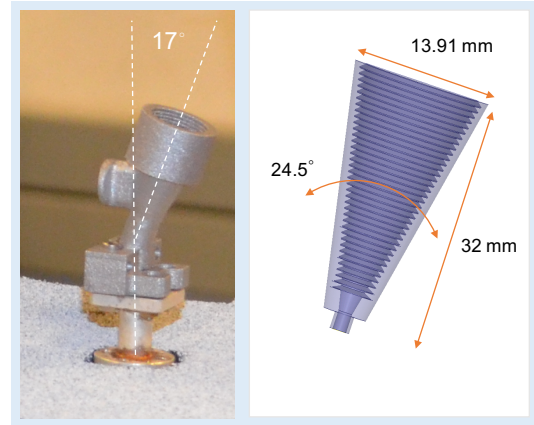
(Left) Photograph of the 3D Printed metal AlSi10Mg feed horn. (Right) Schematic showing dimension of the feed horn conical section.
